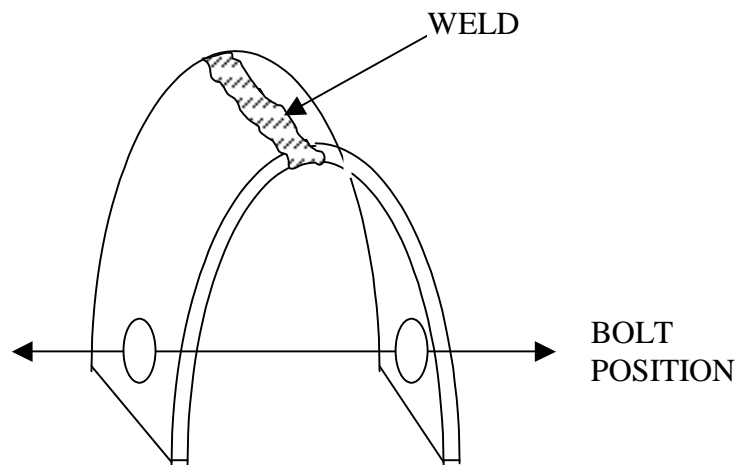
Schematic representations showing the position of the weld in the U-bend specimens.
